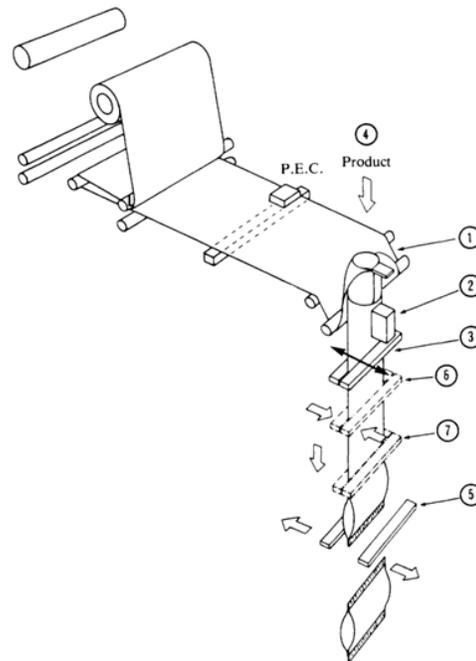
VFFS machine; 1, film from reel made into a tube over forming shoulder; 2, longitudinal seal made; 3, bottom of tube closed by heated crimped jaws which move downwards drawing film from reel; 4, pre-determined quantity of product falls through collar into pouch; 5, jaws open and return on top of stroke; 6, jaws partially close and 'scrape' product into pouch out of seal area; 7, jaws close, crimp heat seal top of previous pouch and bottom of new one. Crimp sealed container cut off with knife (Paine and Paine, 1992).
